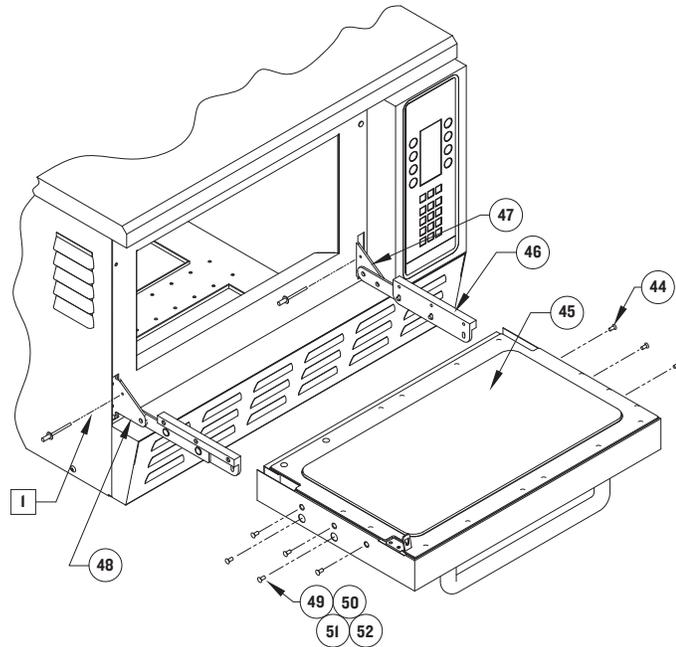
COOK DOOR REMOVAL AND PARTS
